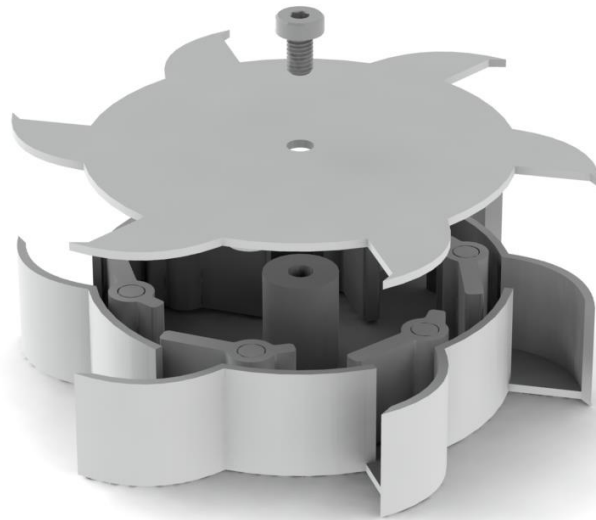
Exploded view of the wheel showing the assembly of its components
